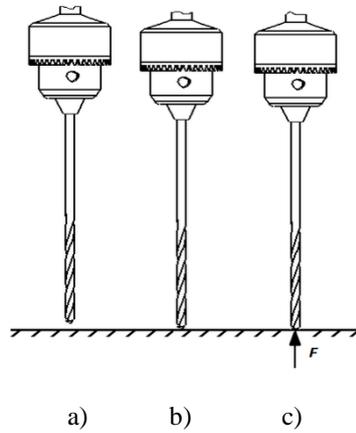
Schematic of the analysis of the micro drill: before touching a) and touching b) the surface of the workpiece; (c) plunging into the workpiece
